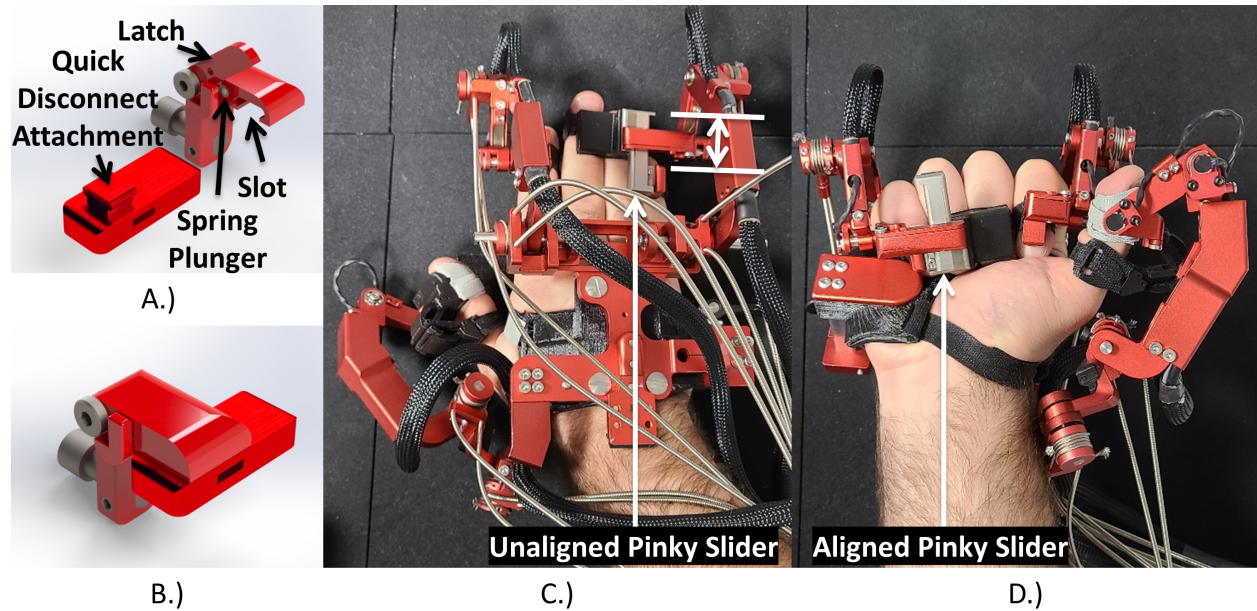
Finger attachments. A.) Exploded view of the quick disconnect mechanism. B.) Assembled view. C.) Posterior view of the 1-1-3 finger attachments with pinky slider unaligned. D.) Anterior view with pinky slider aligned.
